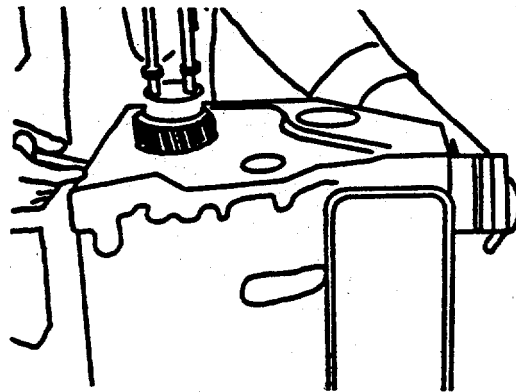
Remove Rod and Piston Assembly from Bore.
